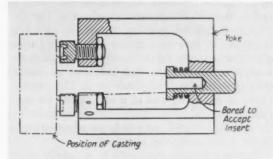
A checking fixture, in the form of a three-armed yoke, for use with a dial indicator.
